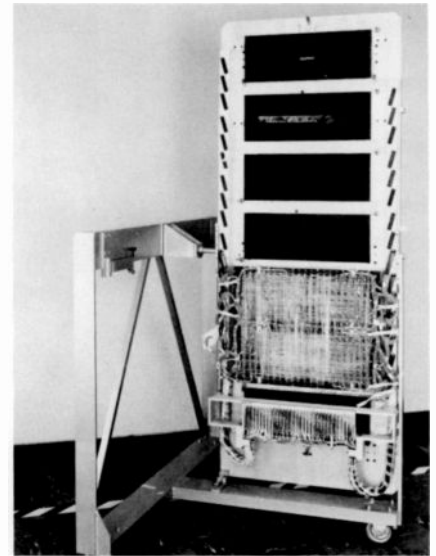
A typical T cart with a backplane UUT registered and locked onto the mounting surface which has been flipped and secured into the vertical position preparatory for wheeling into the interface machine.
